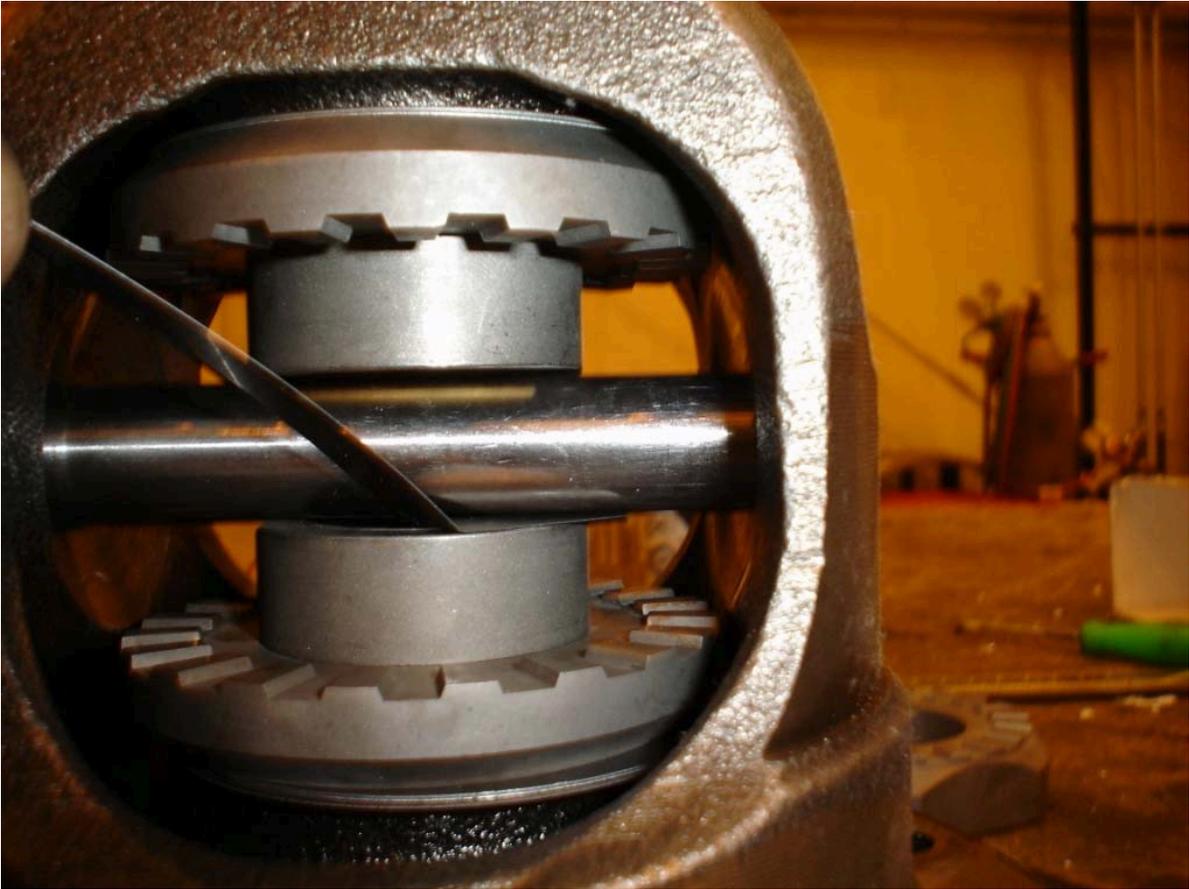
Sliding the 2nd cam gear in after clearing the carrier.
